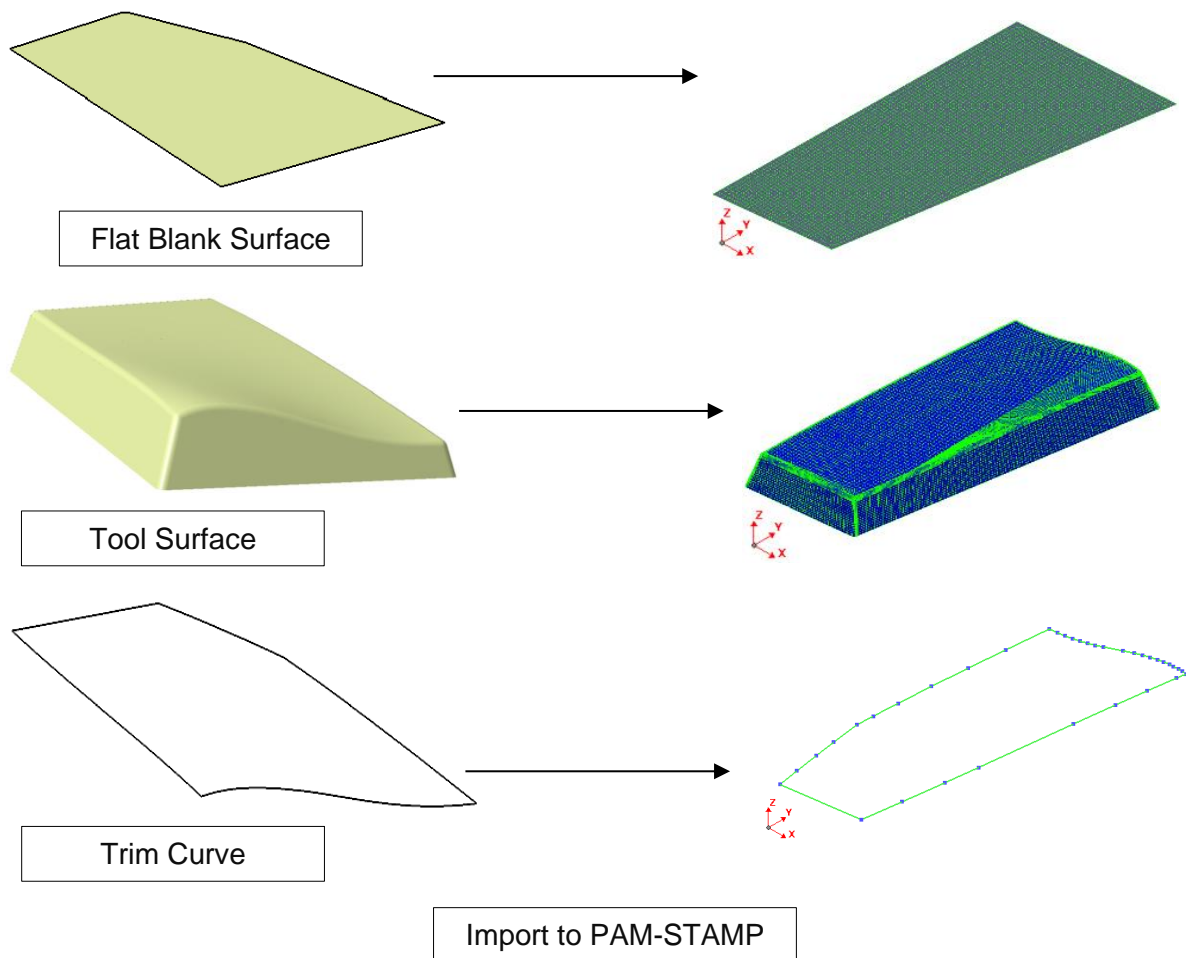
Blank and tool surface geometry and trim curve import into PAM-STAMP 2G
